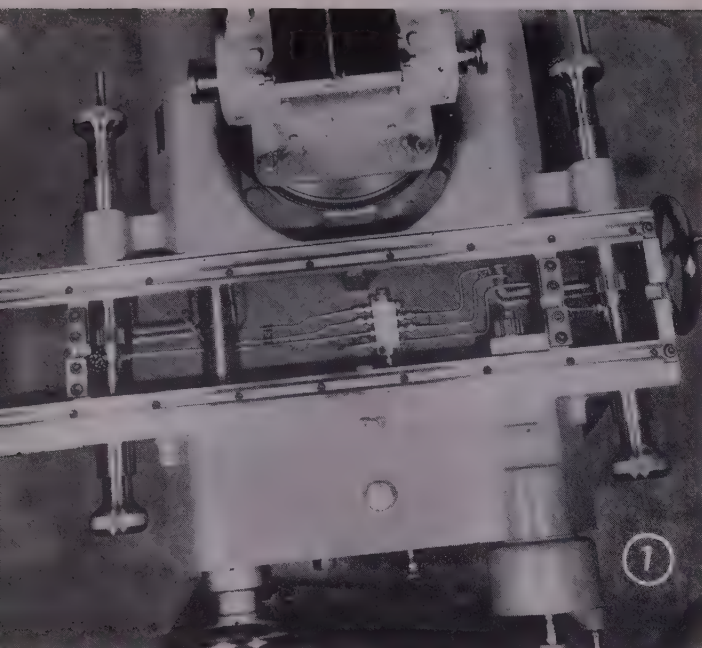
Lubricating lines in the saddle of a No. 2 cutter and tool grinder, with table removed. Oil is fed to the distributor in the center from which it goes to the various bearings. Photo courtesy Cincinnati Milling and Grinding Machines Inc.
